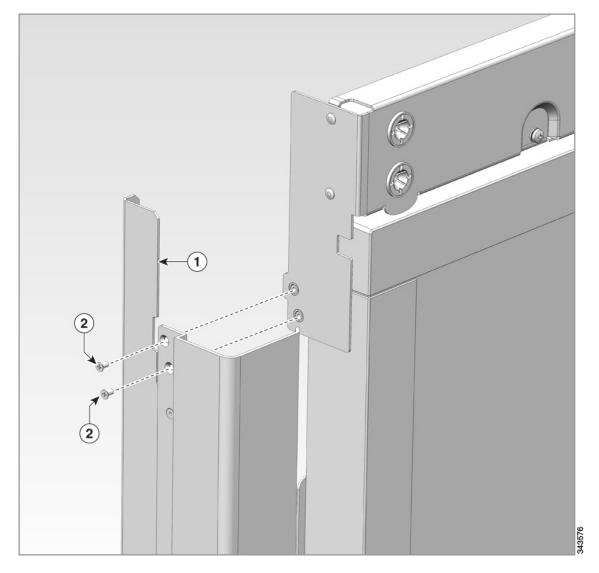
Installing the Bottom Bezel Mounting Brackets
